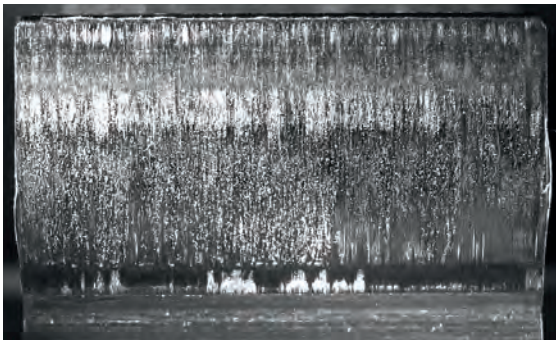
Exemplary scuffing damage in the test "A/16,6/90 spray lubrication"
